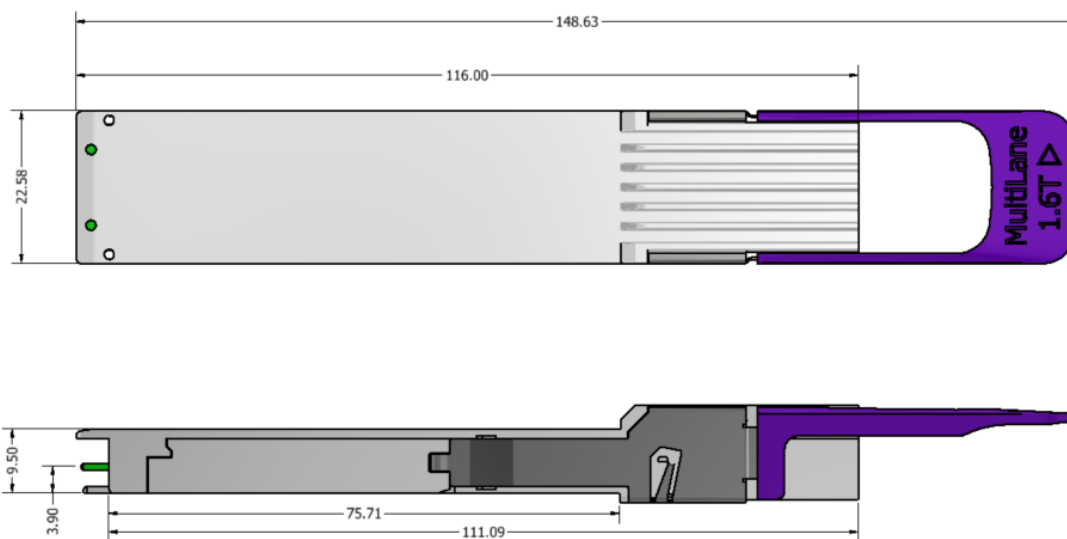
ML4064-AL7R-224 Mechanical Dimensions
